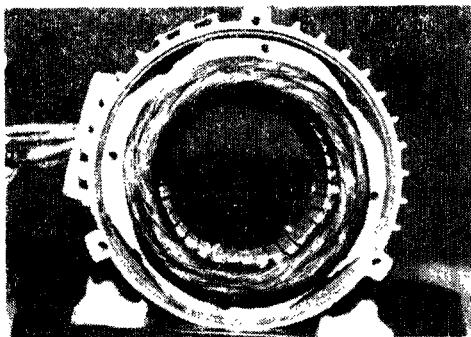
9/9. full-pitch double-layer winding for 600, 1800rpm driving.
